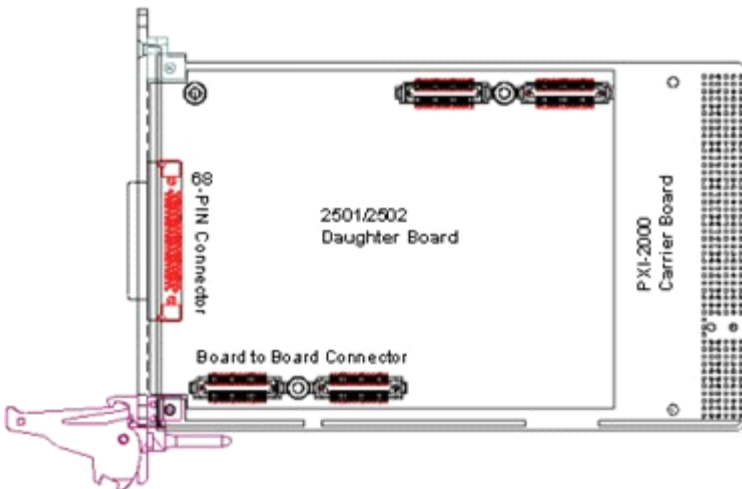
PCB Layout of the PXI-DAQ-2502/2501
